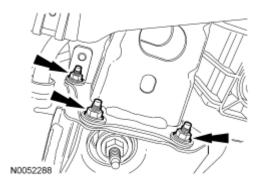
Locating RH Subframe-To-Lower Bumper Nuts Courtesy of FORD MOTOR CO.
